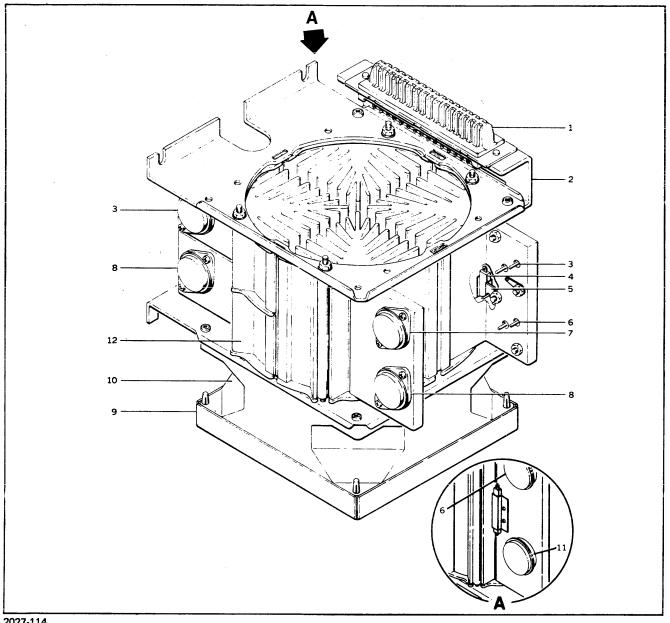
A311 Transformer Assembly, Parts Identification Diagram
